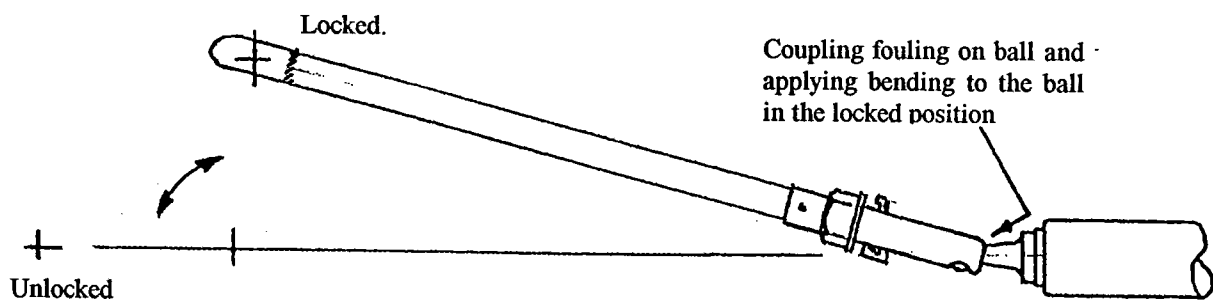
DIVEBRAKE PUSHROD INSTALLED INCORRECTLY
